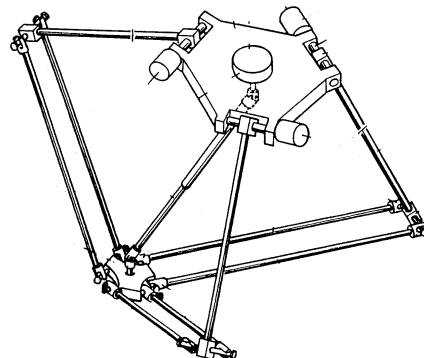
Delta-robot with rotatory drives supplemented by a telescopic cardan shaft from [Cla91]
